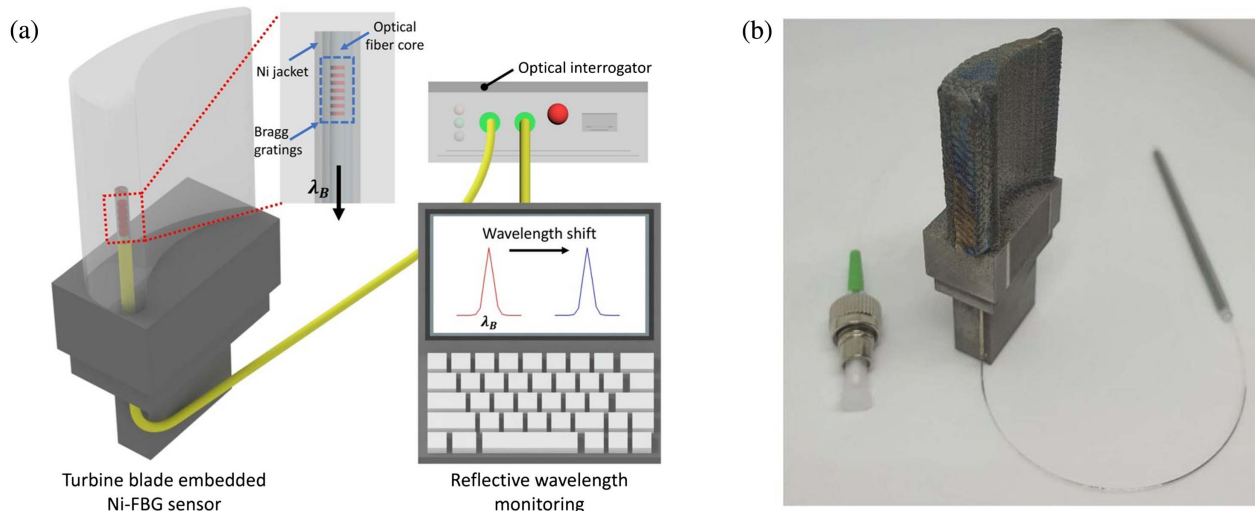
(a) Schematic diagram of turbine blade with an embedded Ni-FBG sensor fabricated by DED printing for high-temperature monitoring; (b) physical image of a fully DED-printed miniature turbine blade with an embedded Ni-FBG sensor^[149].
